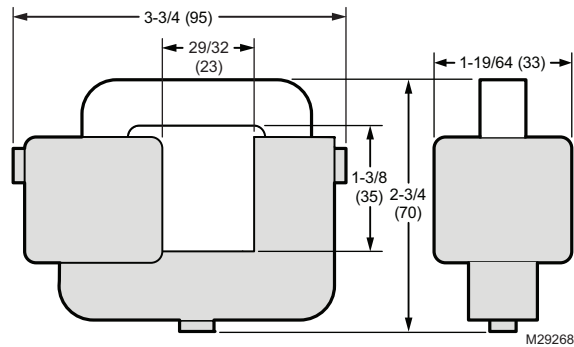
25-200 Amp current sensor dimensions in in. (mm).
